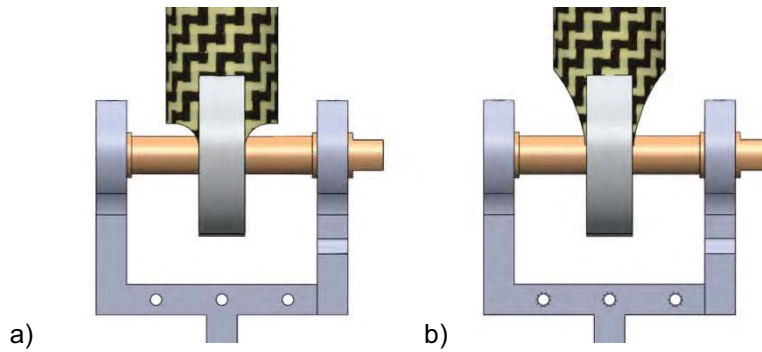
Tape spring hub mechanism design concept requires no clearance trimming
